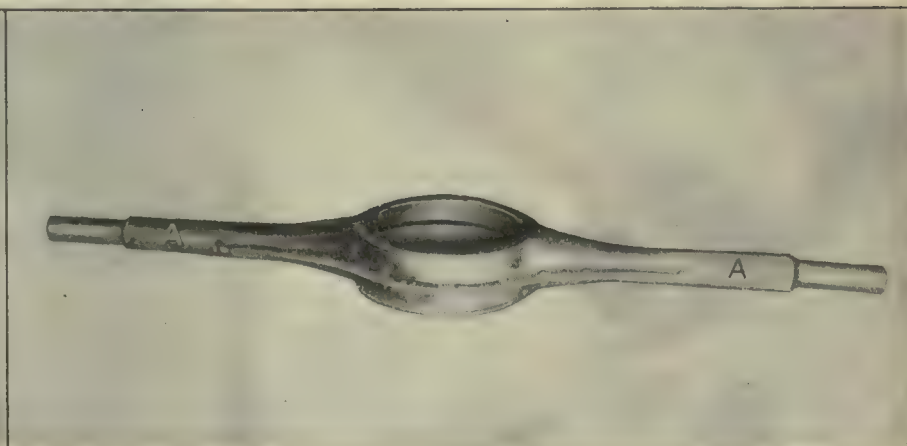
FINAL WELDING OPERATION ON AXLE HOUSING
